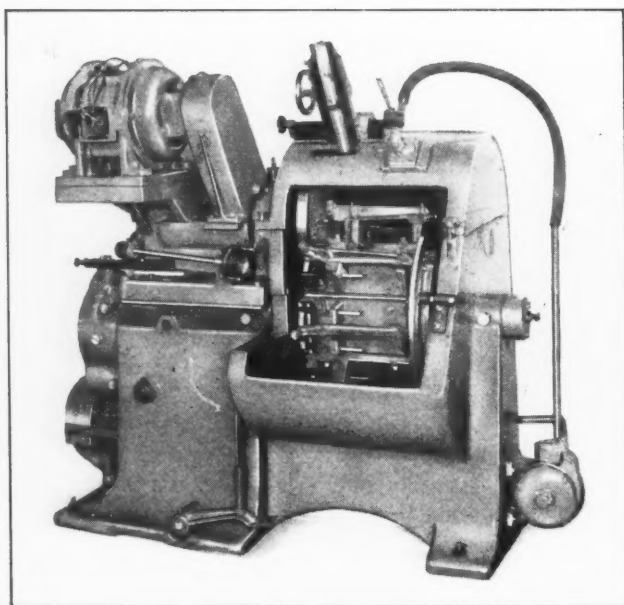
Construction of a Machine Built Primarily for Grinding the Heads of Automobile Valve Tappets
